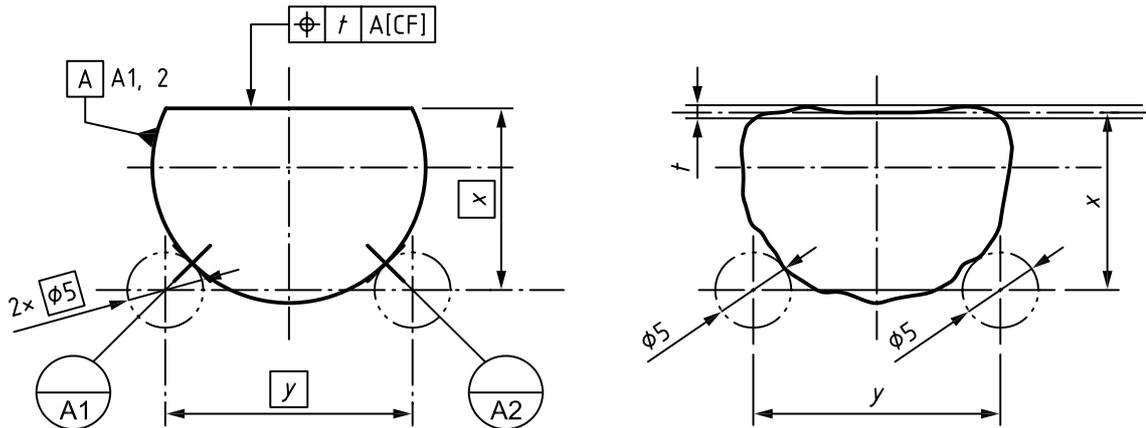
Examples of single datums established on a nominally cylindrical surface, with [CF] (contacting feature) modifier, used in a geometrical specification
